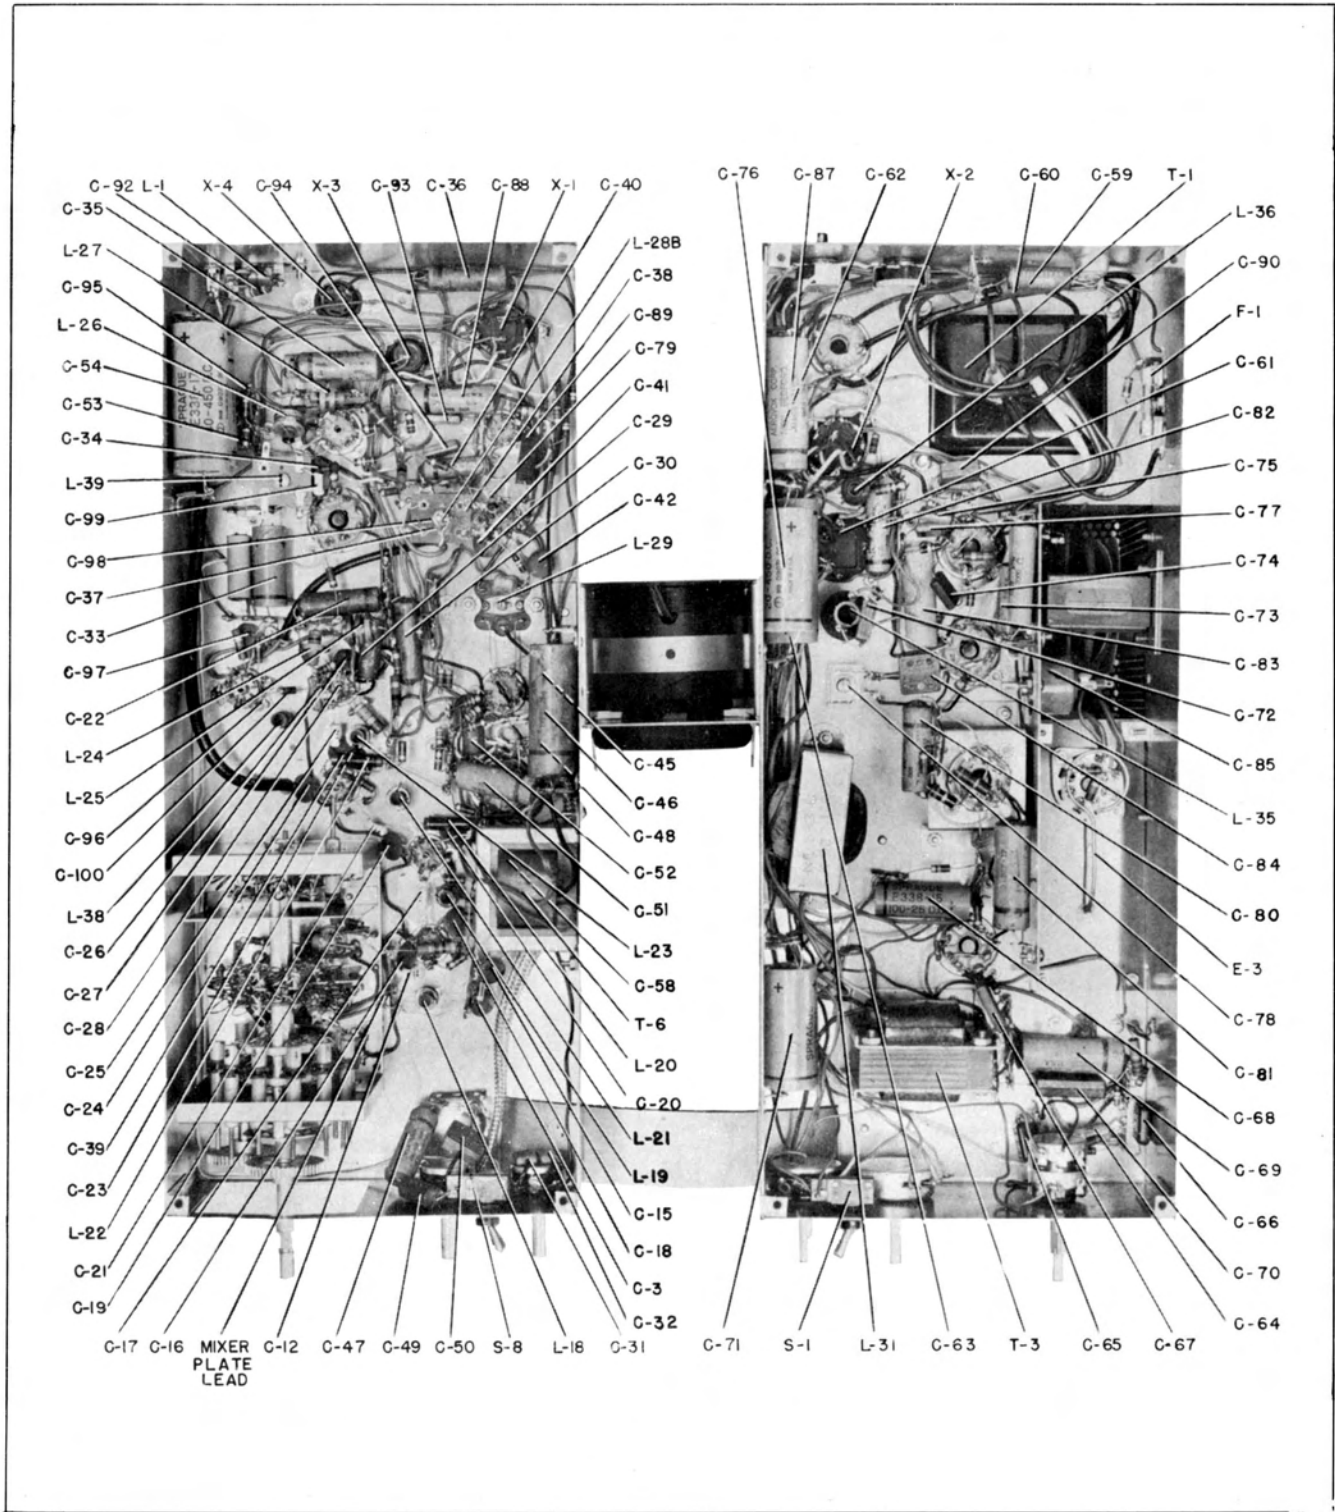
Capacitor and other component Locations — Bottom of Receiver
